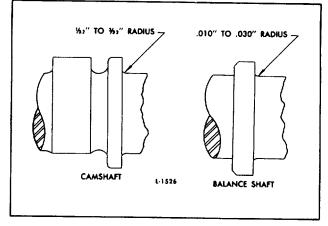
Camshaft and Balance Shaft Journal Fillets
